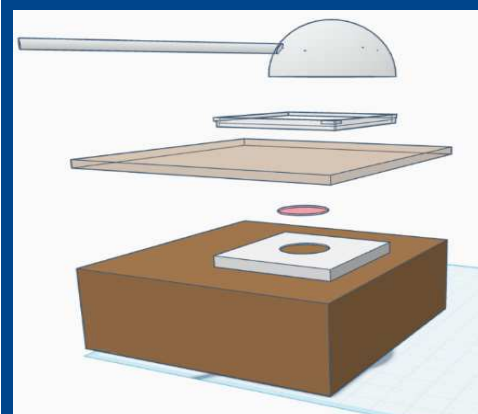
Deconstructed CAD design showing 3D printed film holder, 16mm EBT4 film, alignment tool and Leipzig applicator set up.
